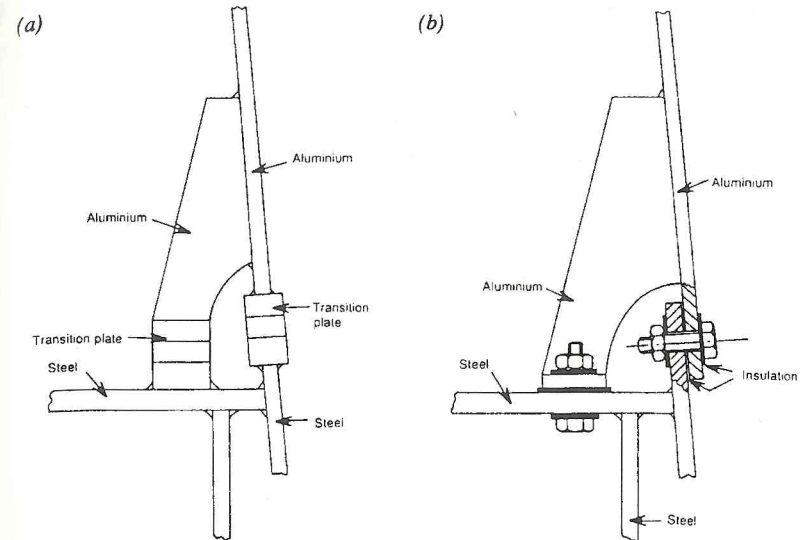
Joining aluminium to steel: (a) welding; (b) bolting
